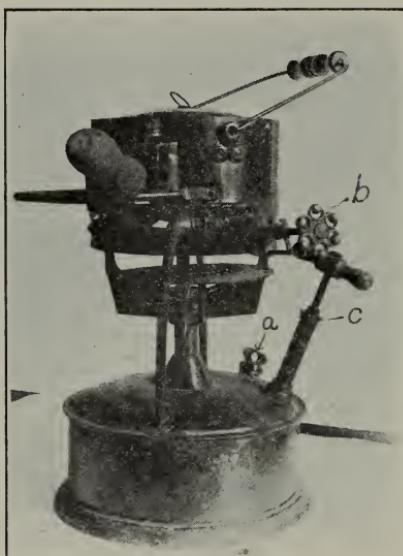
Gasoline torch used in heating capping and tipping steels: (a) Inlet for gasoline; (b) burner cock; (c) air pump.
